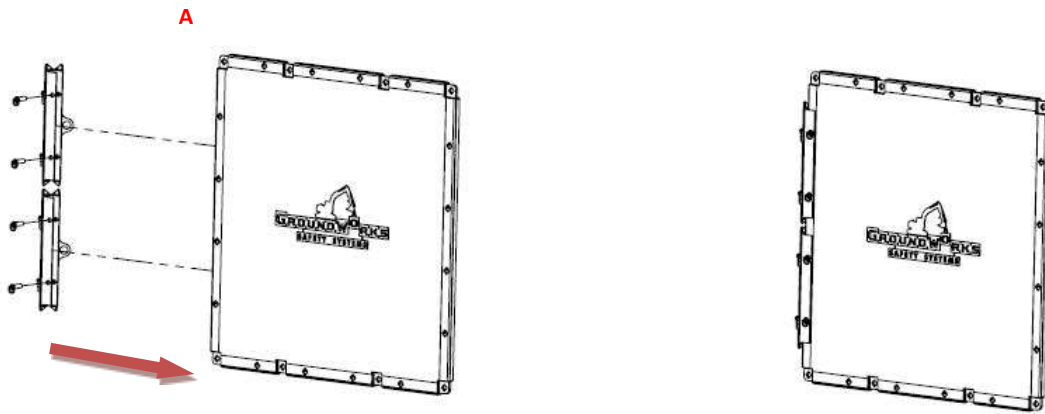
Pit Kit Step Five – Installing Corner Connectors on Third Panel
